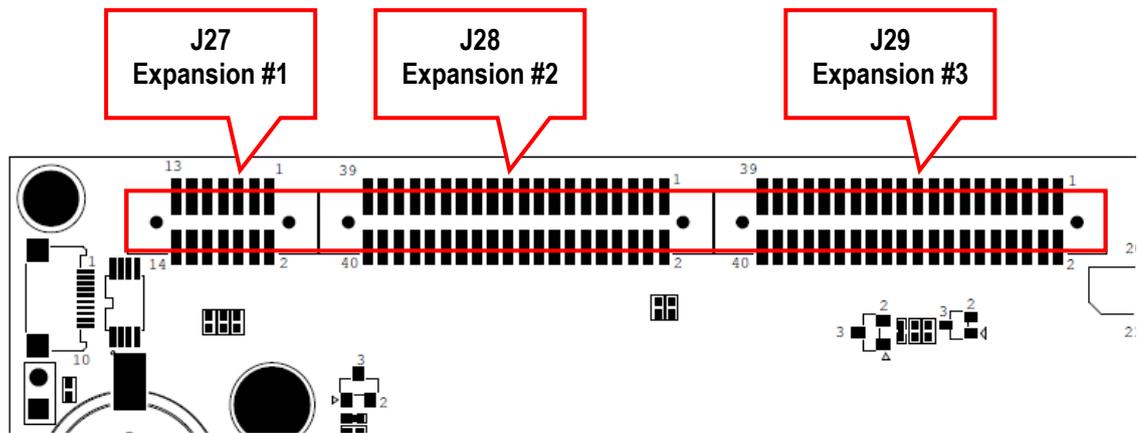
COM Carrier Board, Expansion Connectors on rev A/B/C Boards
